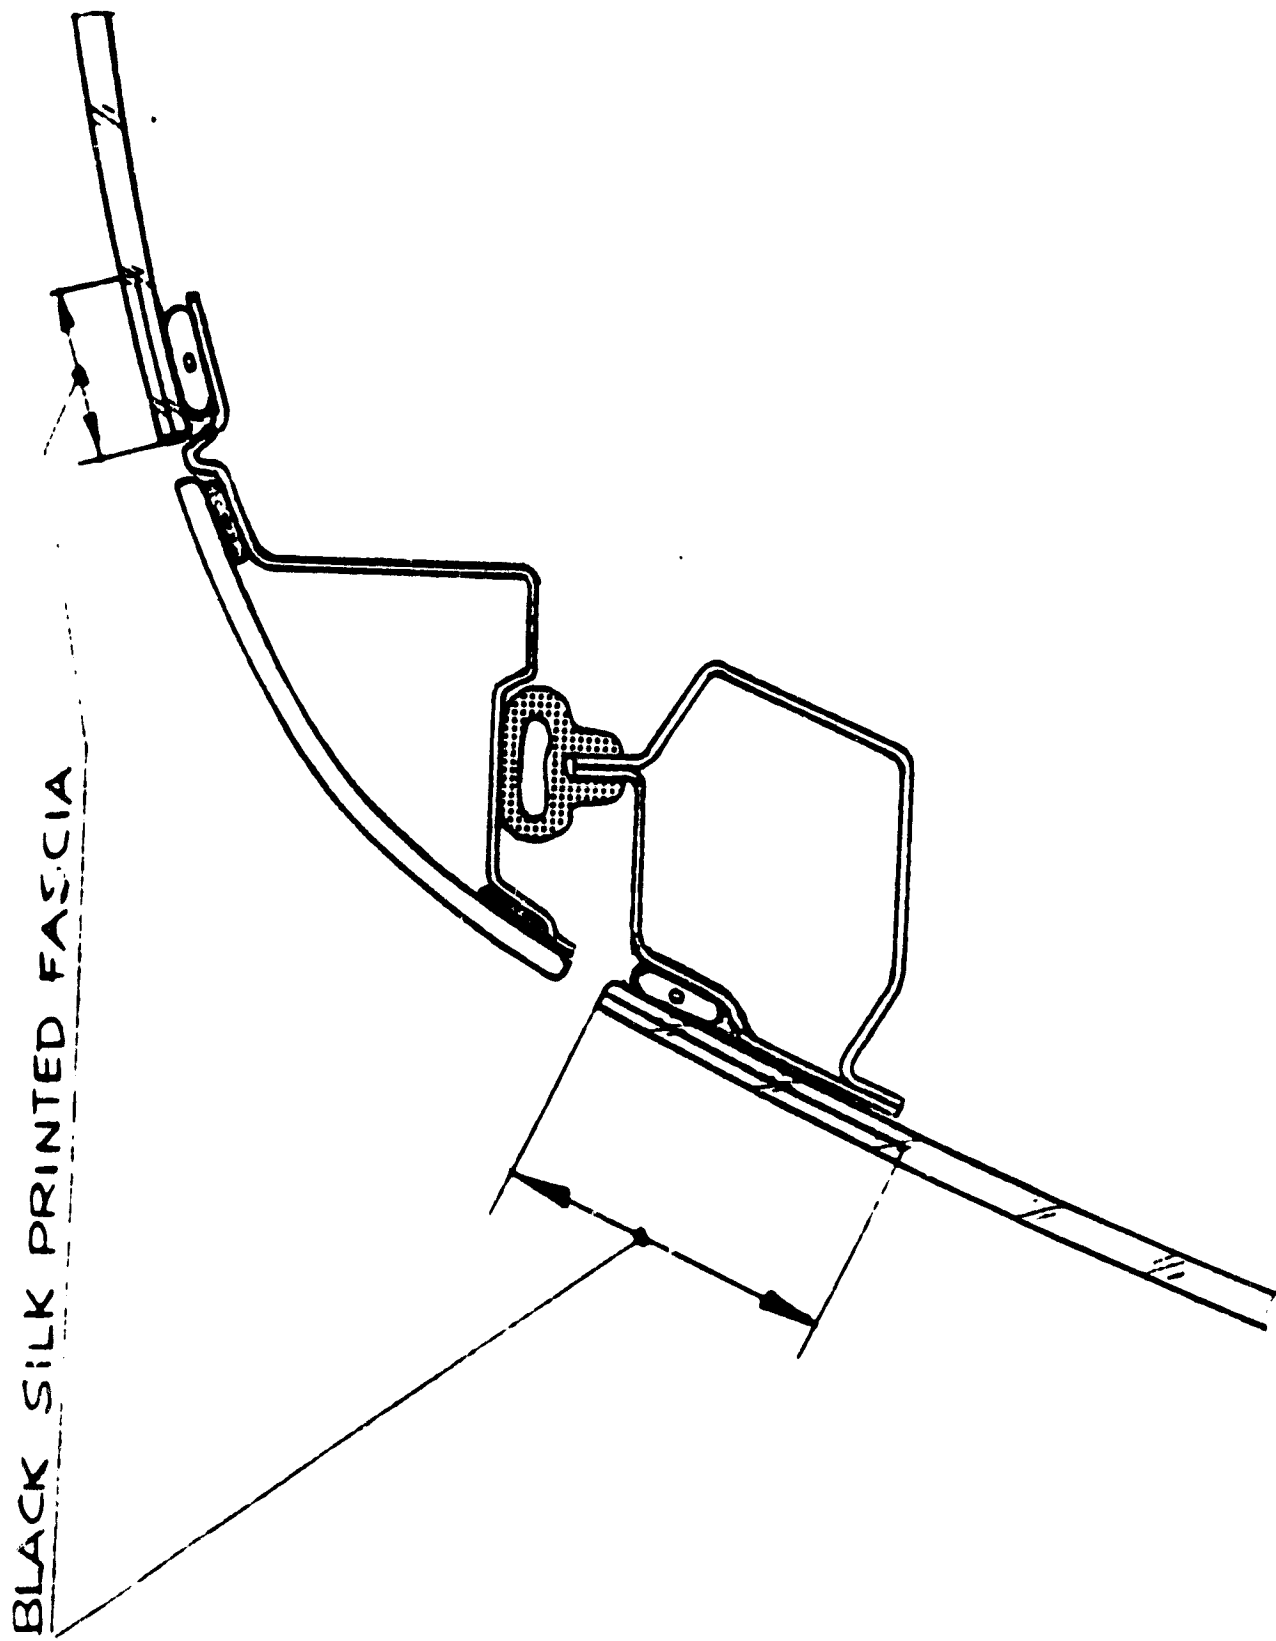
FIFTH DOOR SIDE SECTION
